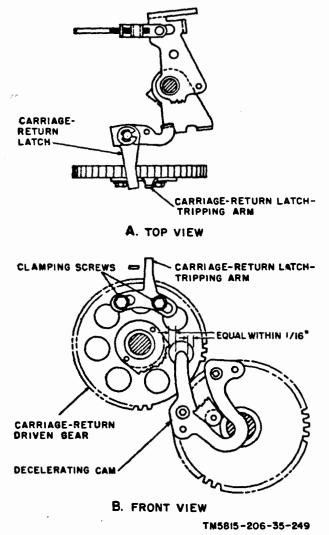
Decelerating cam and carriage-feed-clutch positioning adjustment (TT-4B/TG).
